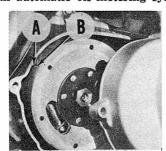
Timing marks (A&B) will be aligned when crankshaft is in correct position for ignition.
